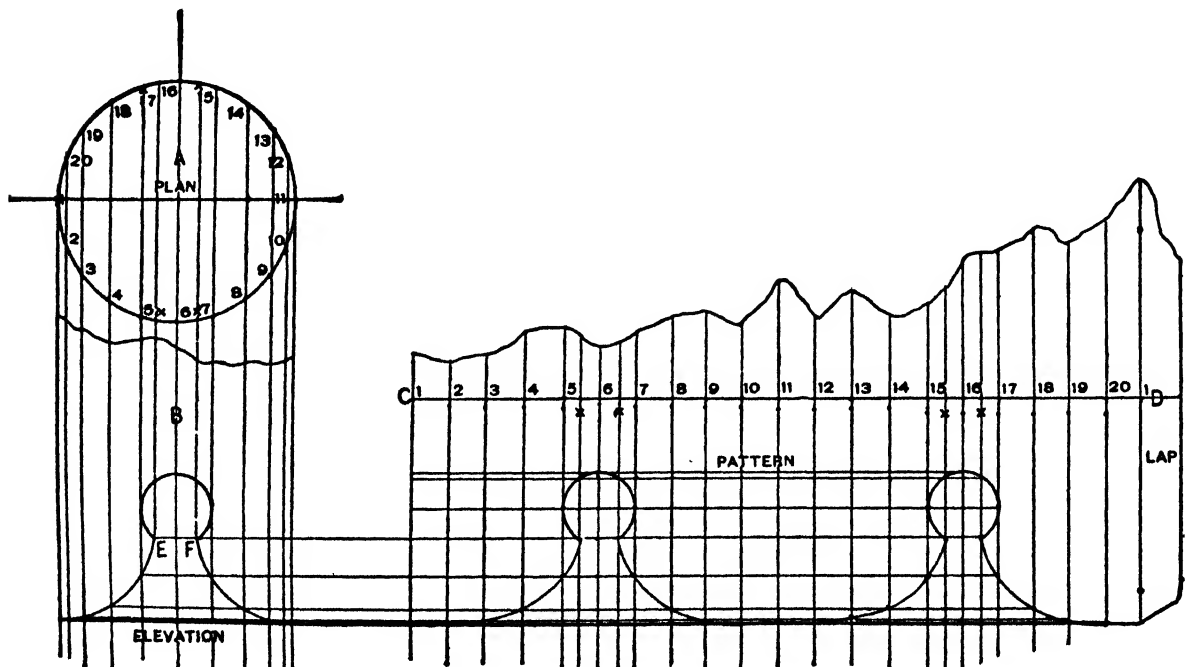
Plan, Elevation and Pattern for Mouth of Spout Shown in Fig. 20
